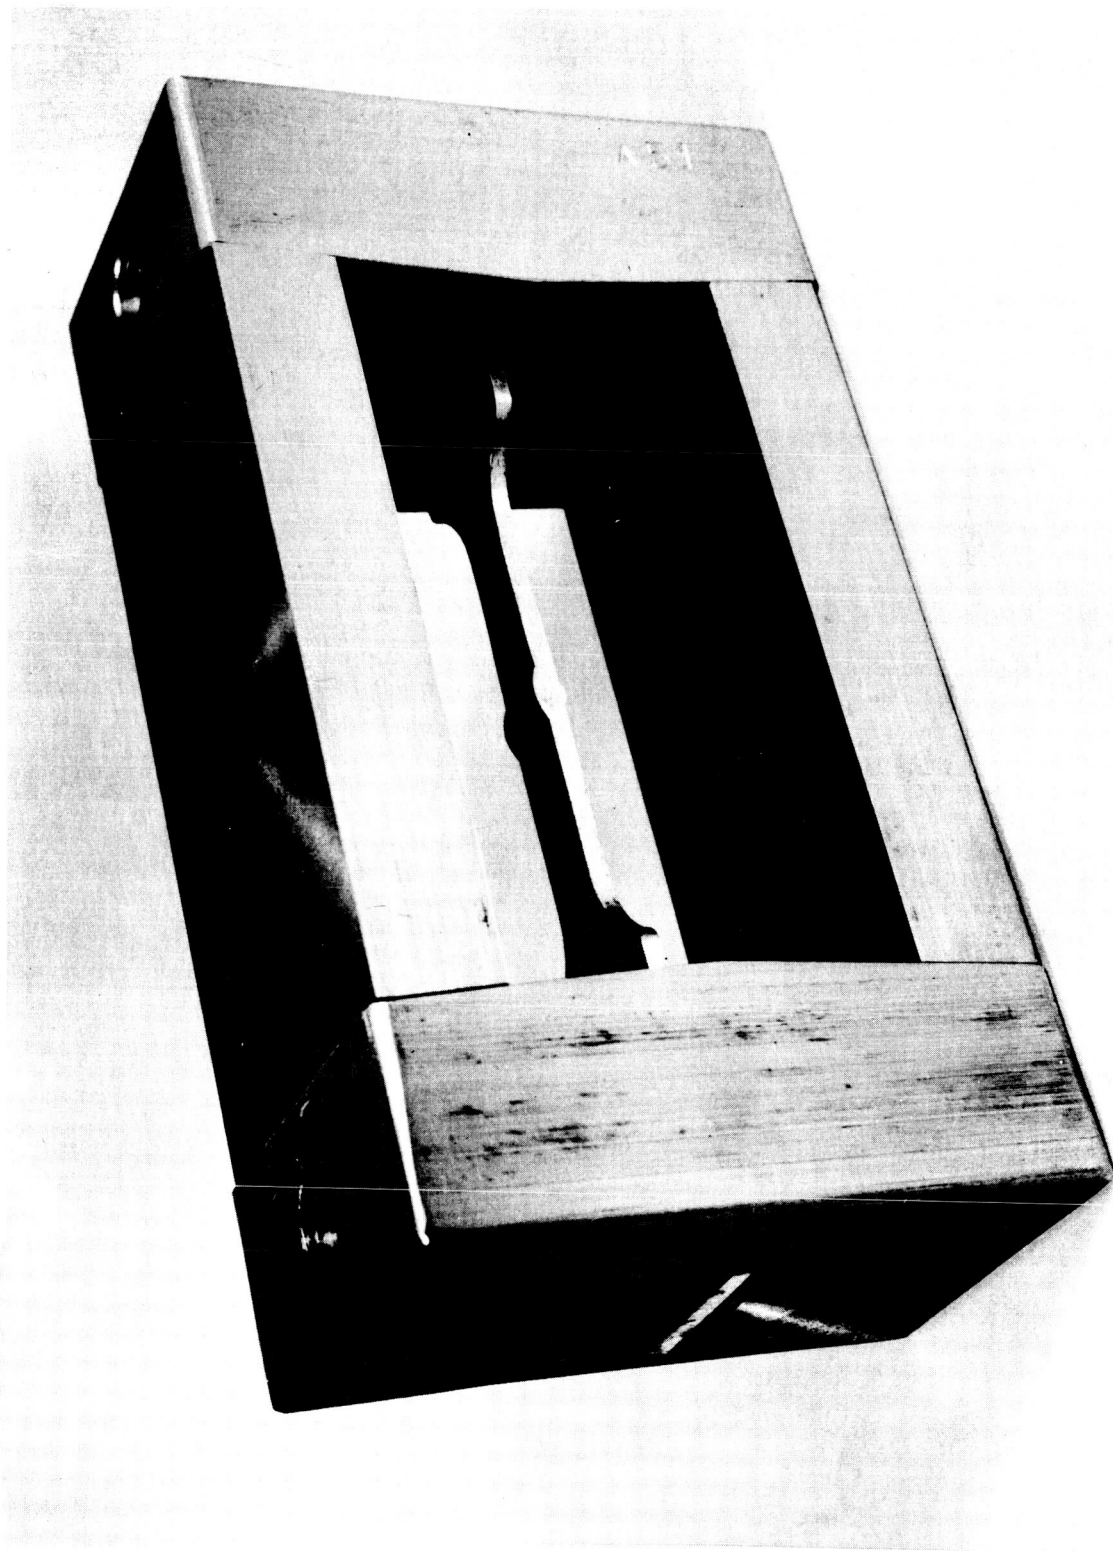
Constant deformation type fixture used to stress 0.125" thick sheet tensile specimens in direct tension
